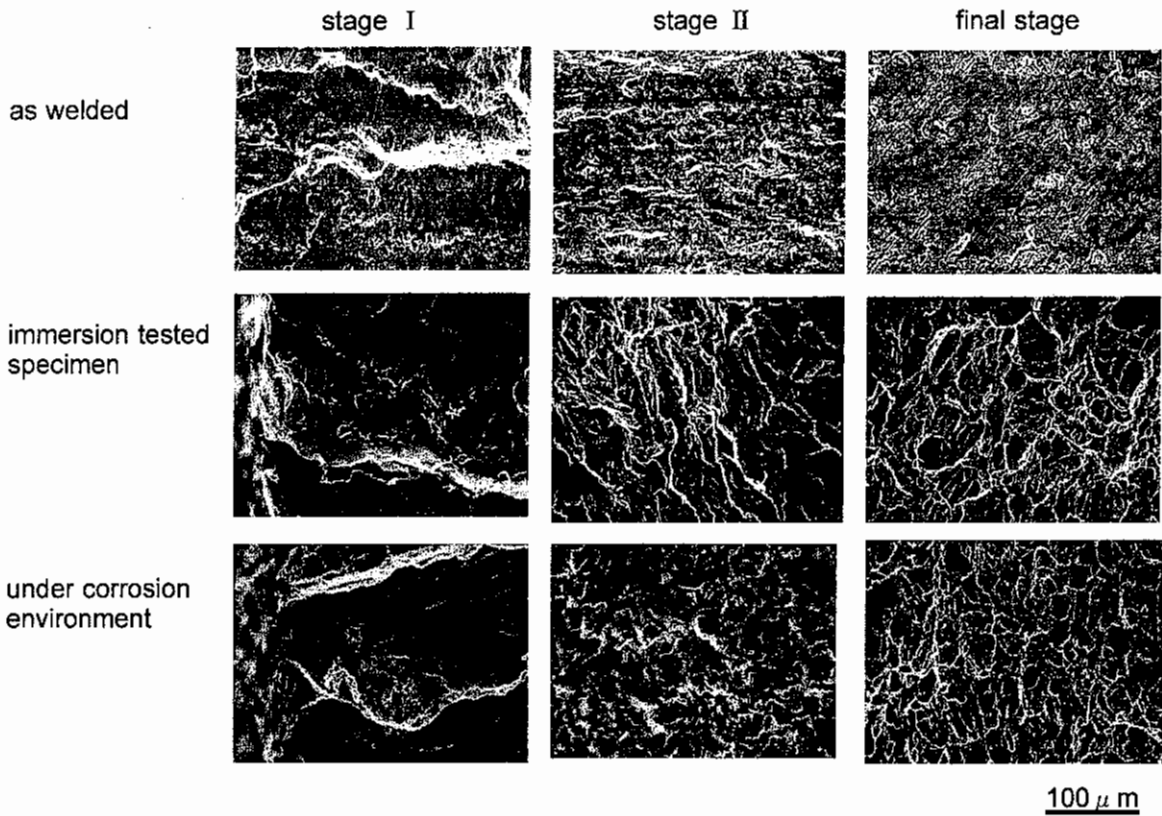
Microfractographs of fatigue fractured specimens.
